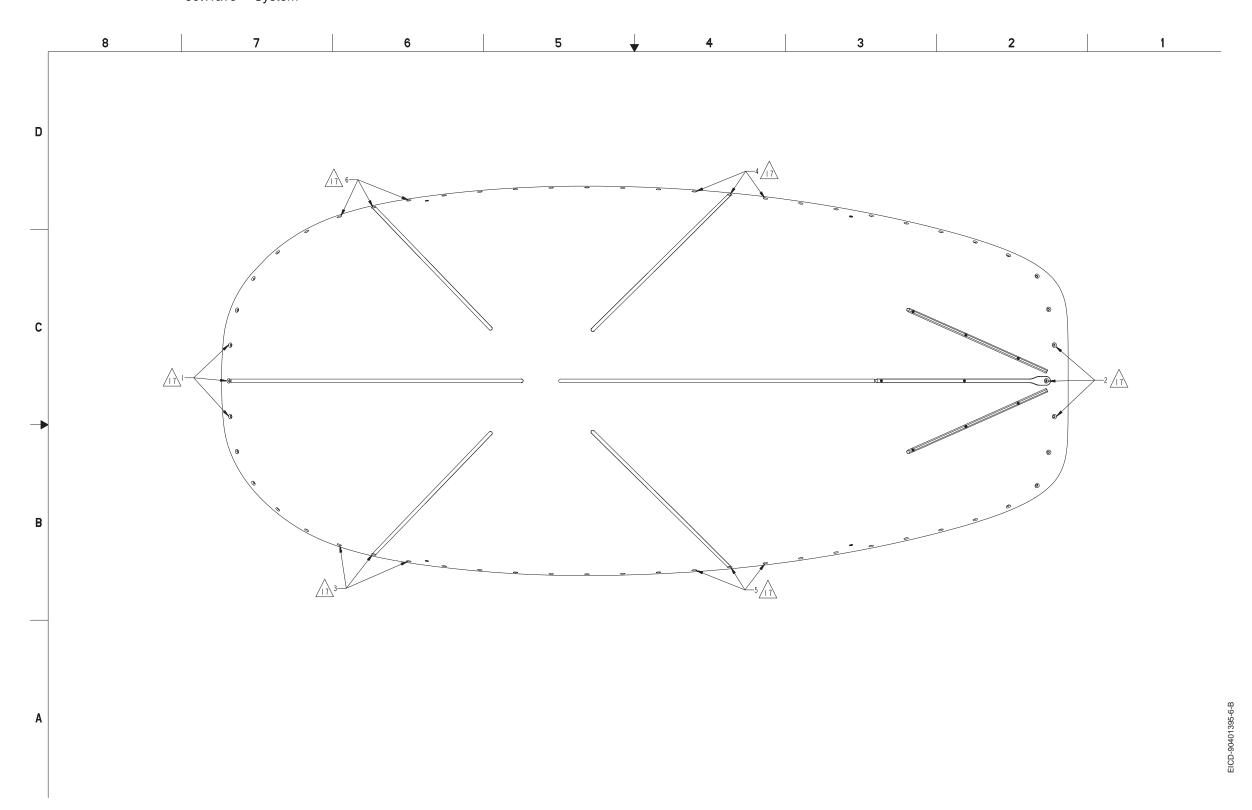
Fuselage Mount Radome Outline and Installation Drawing (Sheet 6 of 6)
